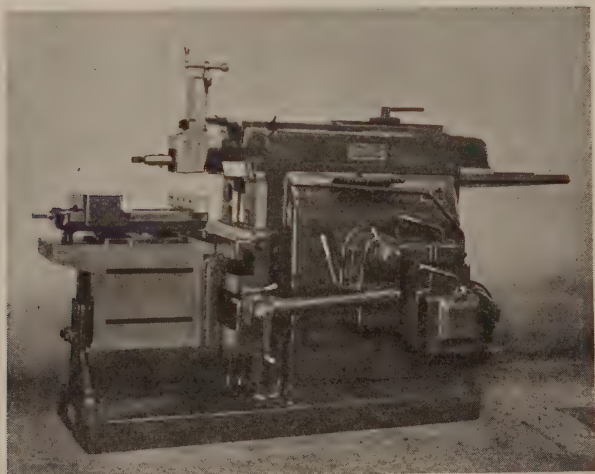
Standard 14-in. crank shaper. (*Courtesy of Gould and Eberhardt.*)
